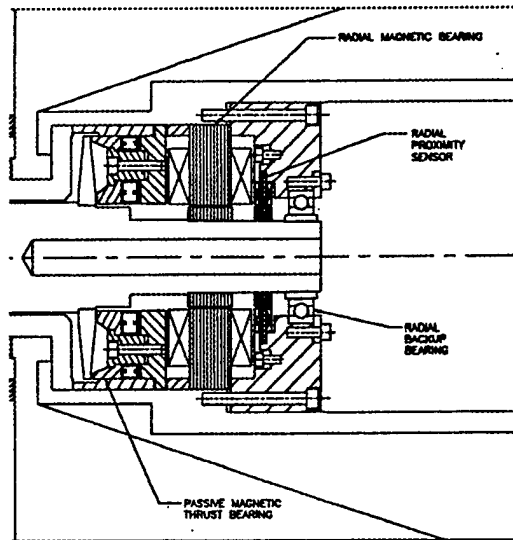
Cross-section of Upper Magnetic Bearing
